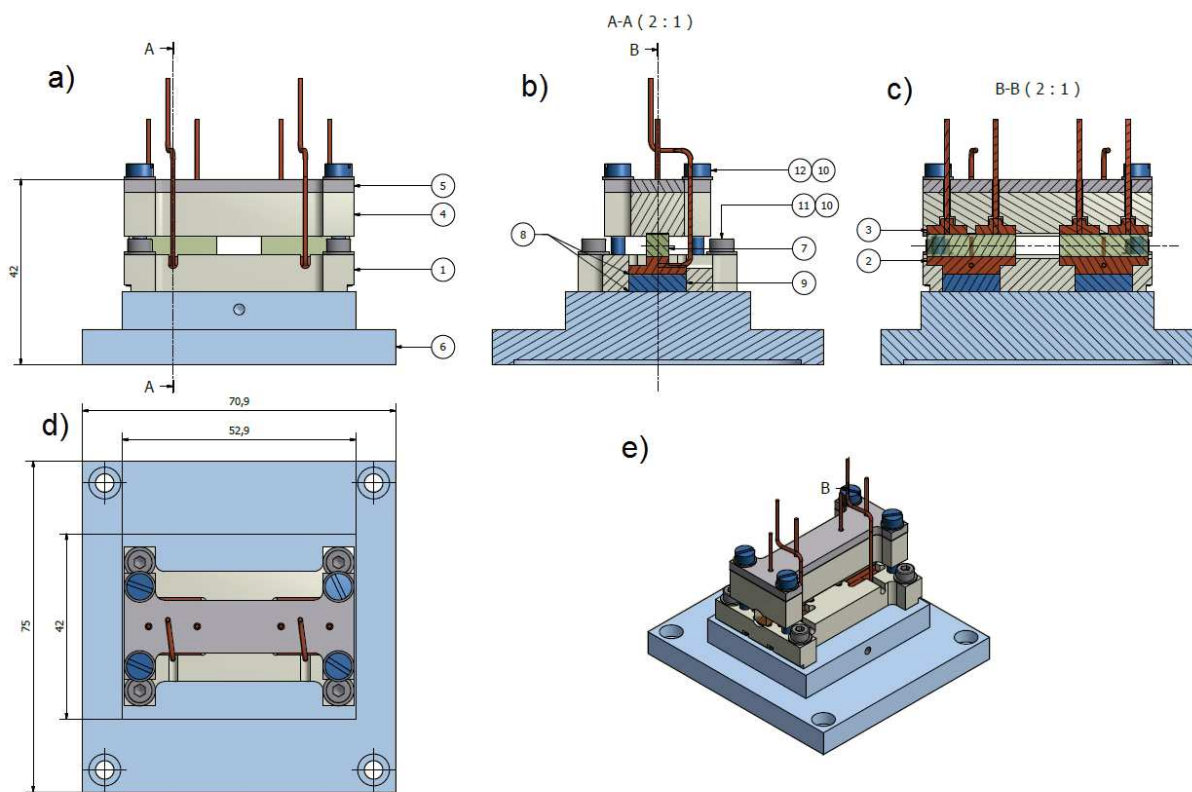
Mechanical drawing of the EOM ; a) side view b) front view c) Cut side view d) Top view e) General view part // 1) bottom teflon part, 2) Ground copper plate, 3) Electrodes, 4) Top teflon part, 9) Peltier modules
